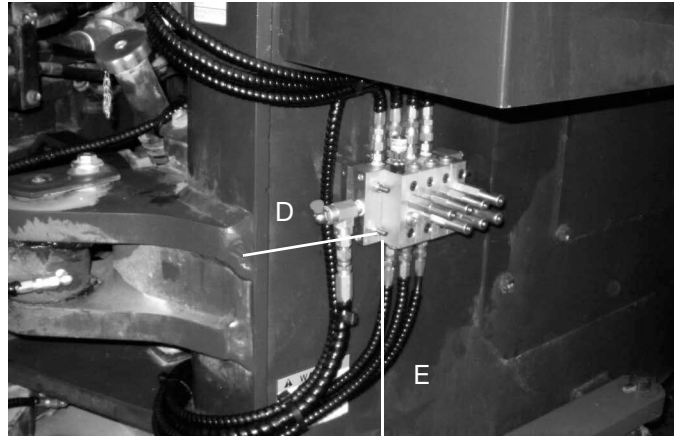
Ensure that there is clearance on the back side of the valve. Spacers (like washers, not included) may need to be added so that the valve seats evenly at all four (4) of the weld studs.
